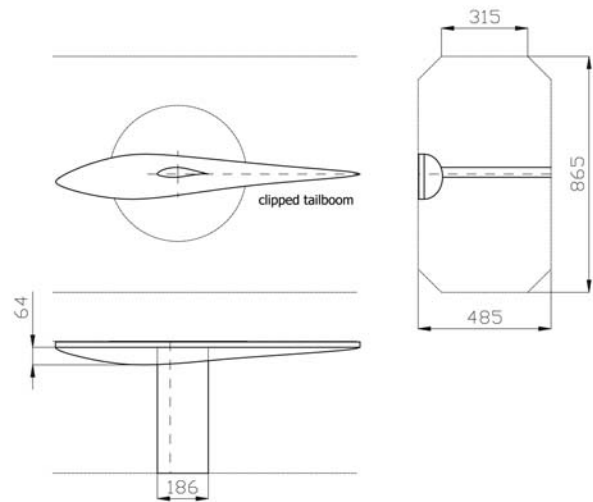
Sketch and dimensions of the model used for wind-tunnel testing.
